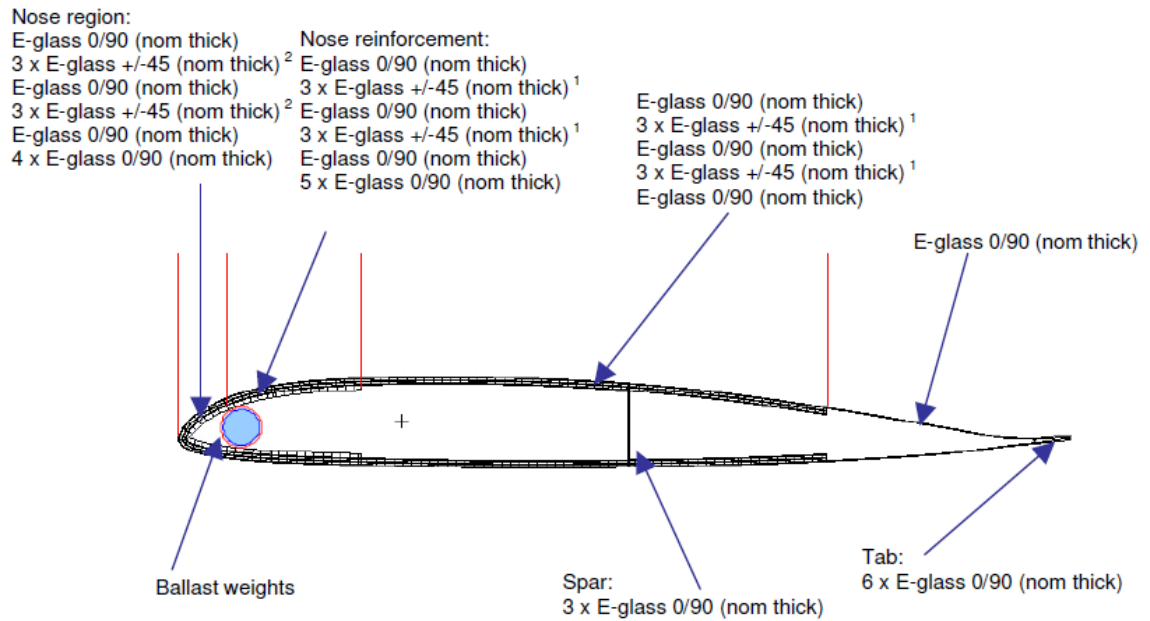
Cross section sketch for layup definition (Section 4)⁴
